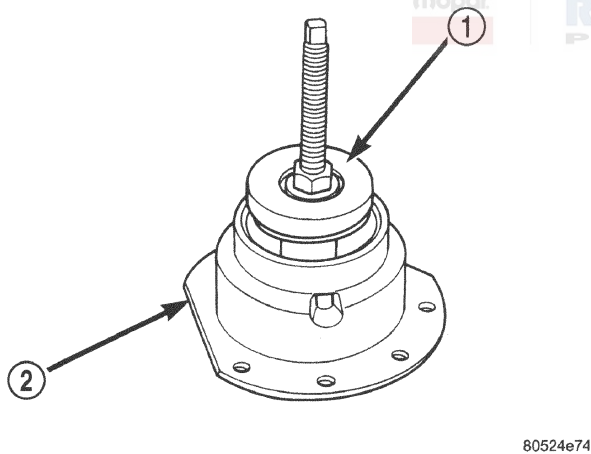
Position Bearing Cup Remover Tool in Retainer
